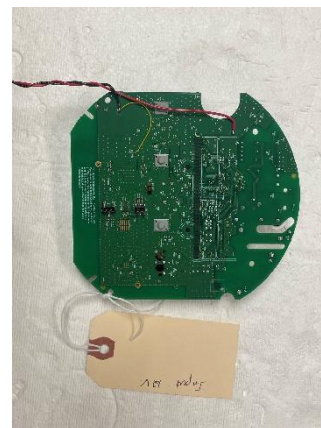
Rear End of the Radiated EUT Module
